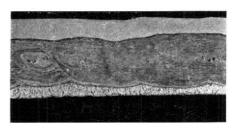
Seam weld between dissimilar materials (S.84 and S.110).
